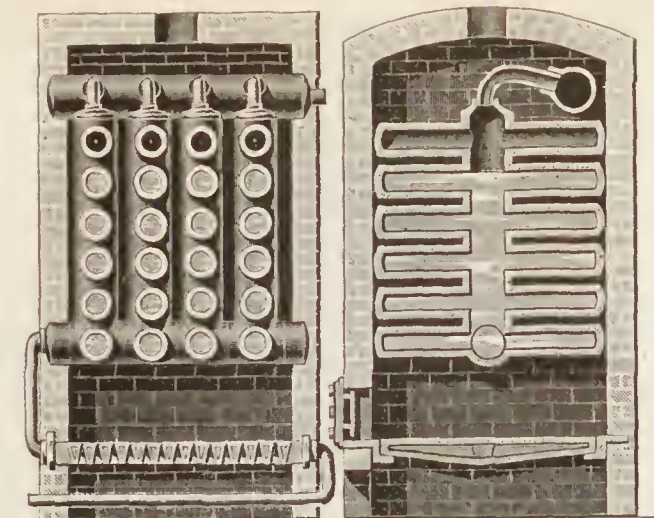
THE B. T. BABBITT BOILER, 1869.
